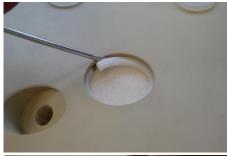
By means of a screwdriver, remove the circlip [27] and muffler [25]
